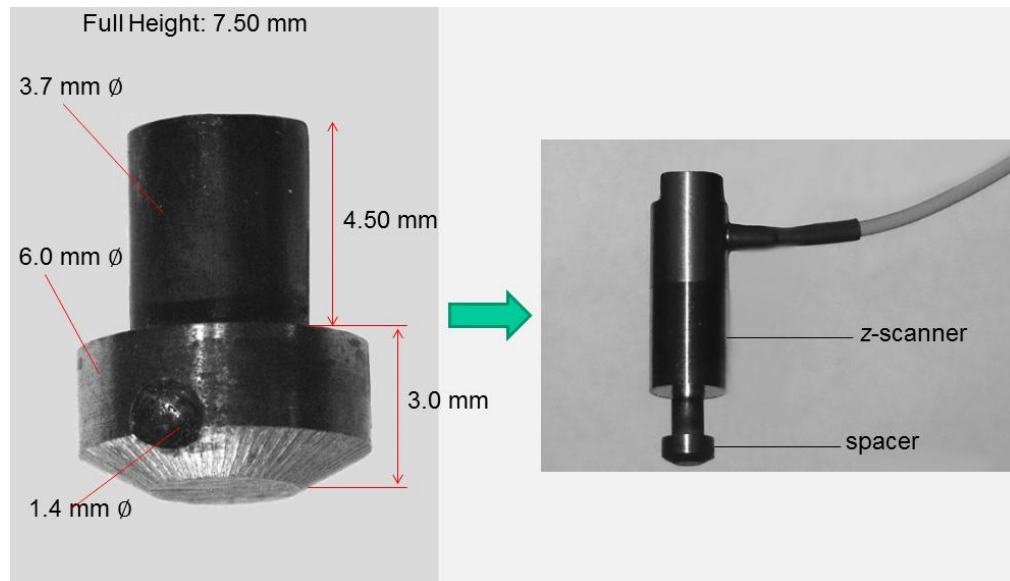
(Left) A close-up of custom-fabricated spacer piece. (Right) The spacer piece after being rigidly glued to the piezoelectric z-scanner (P-820-10).
